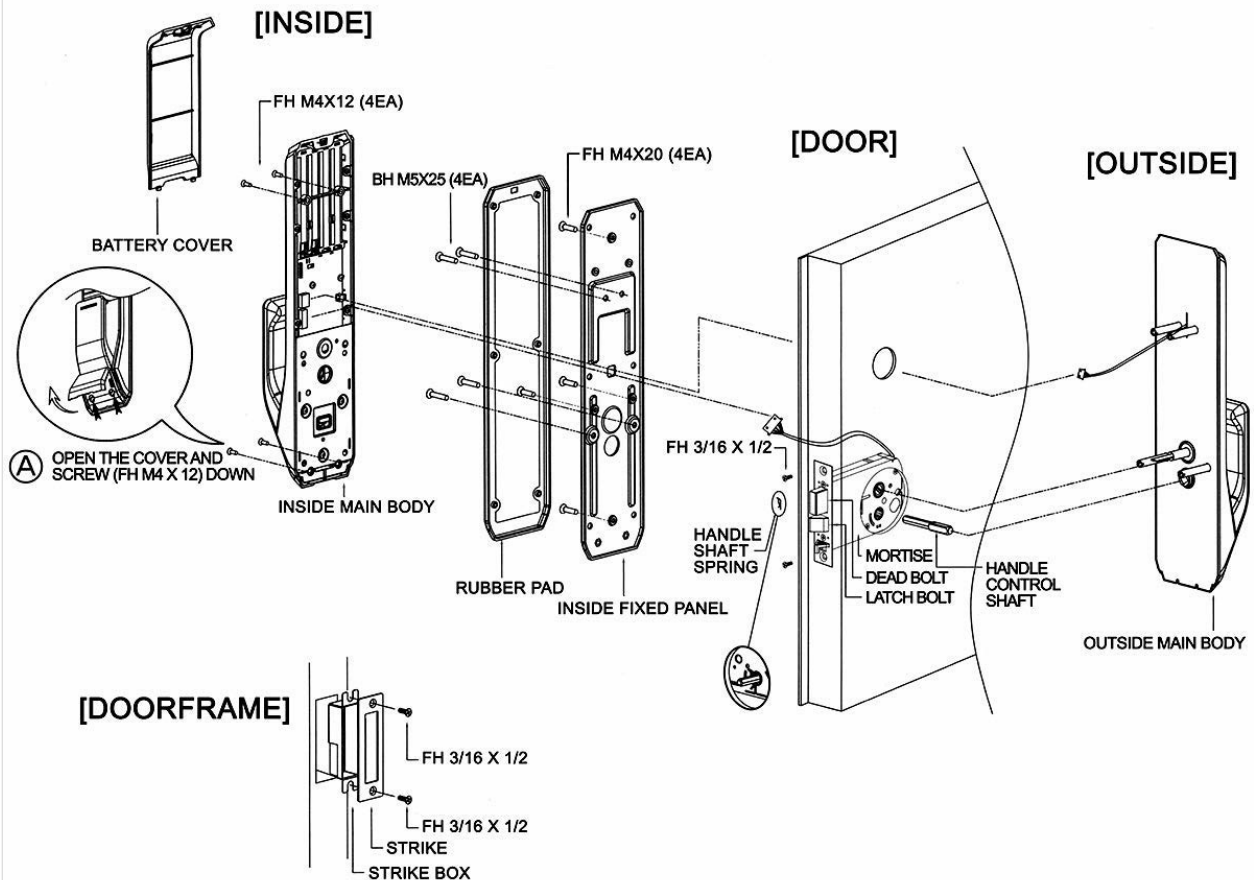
Exploded diagram illustrating the installation components and their placement.
